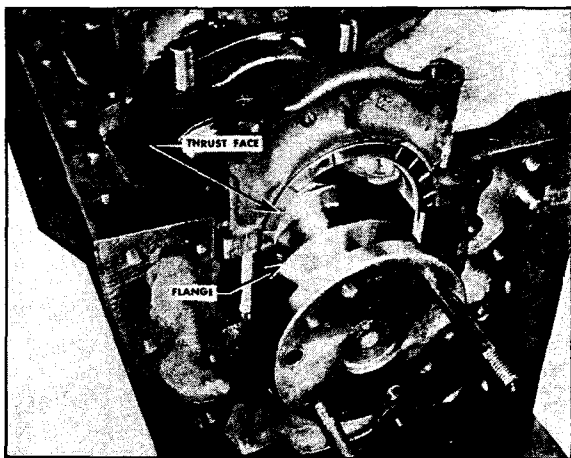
No. 7 main bearing cap and lower thrust rings
